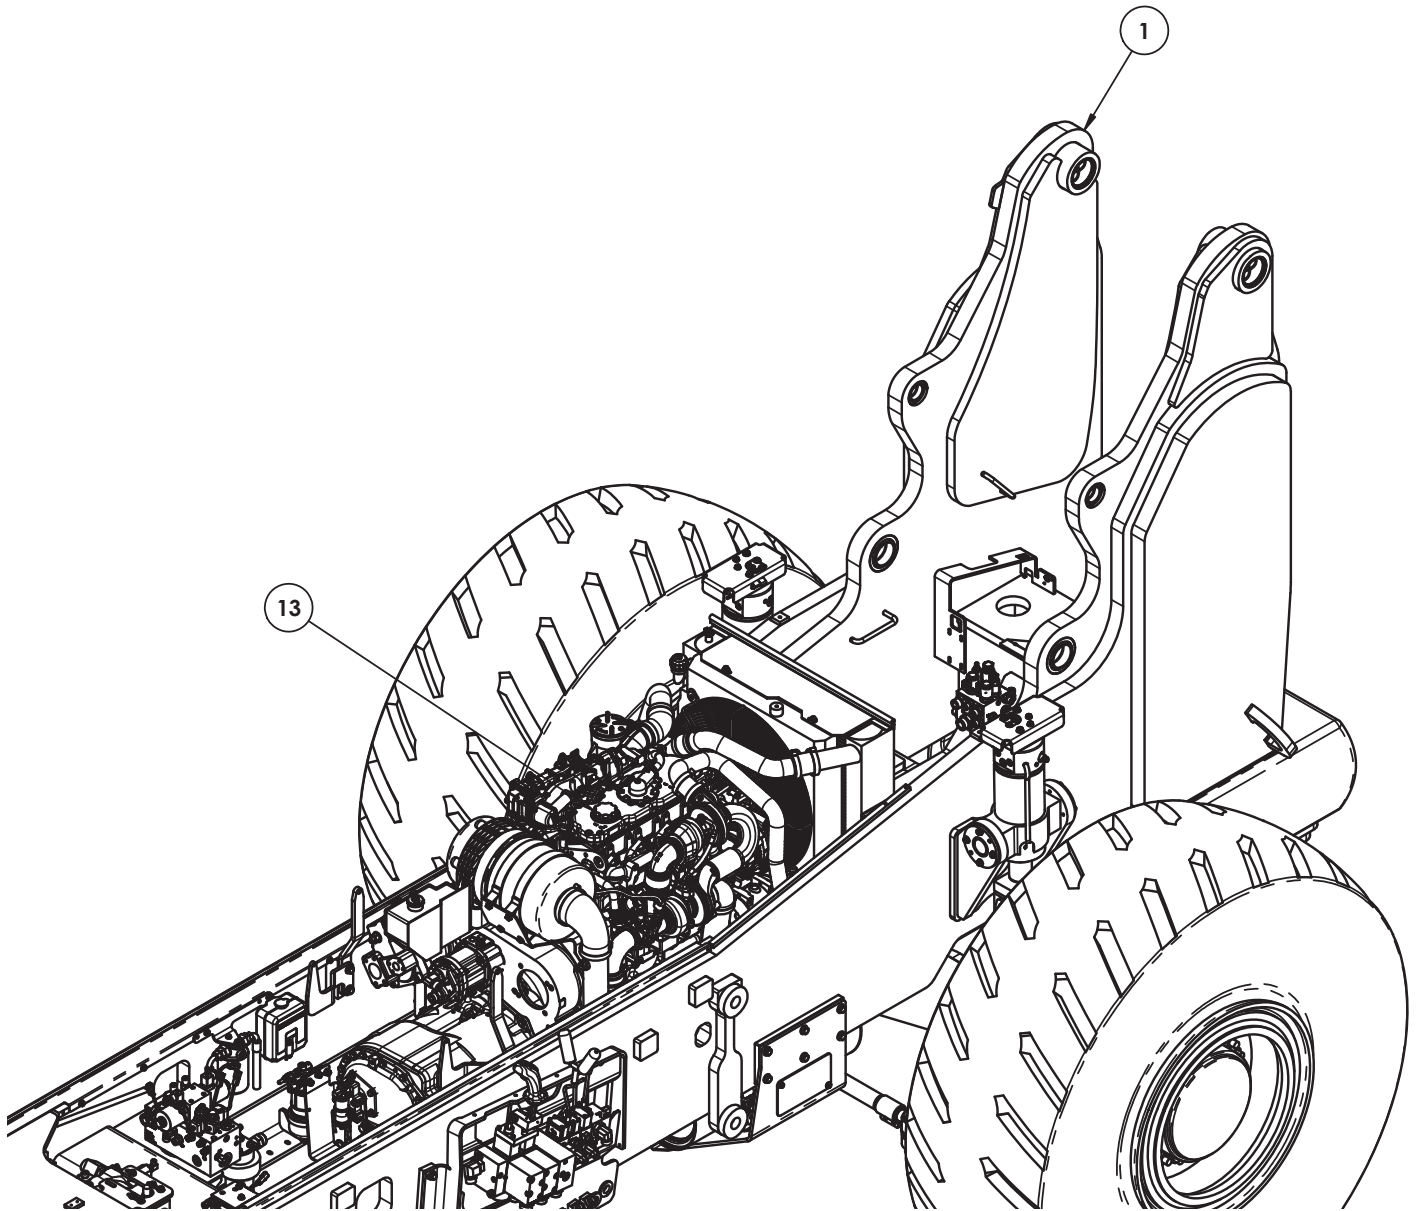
CHASSIS ASSEMBLY - ENGINE (32003-000)
